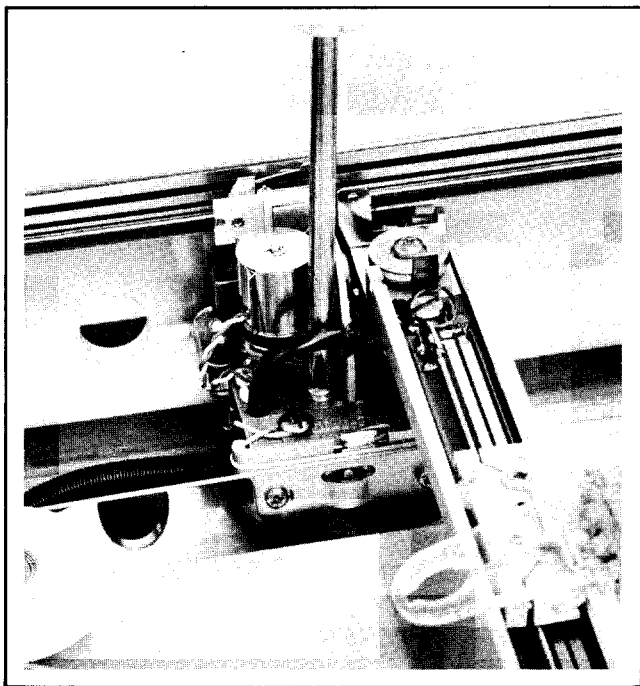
Y-AXIS MOTOR CLAMP SCREW
